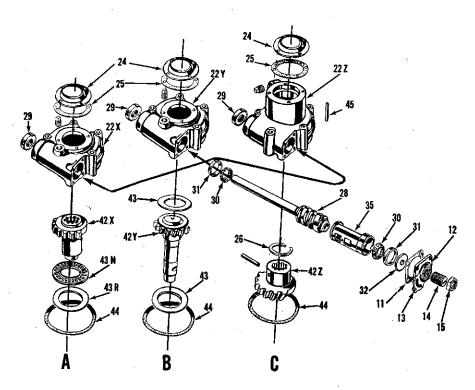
Exploded view of the manual steering gear used on series 333 and 444.
